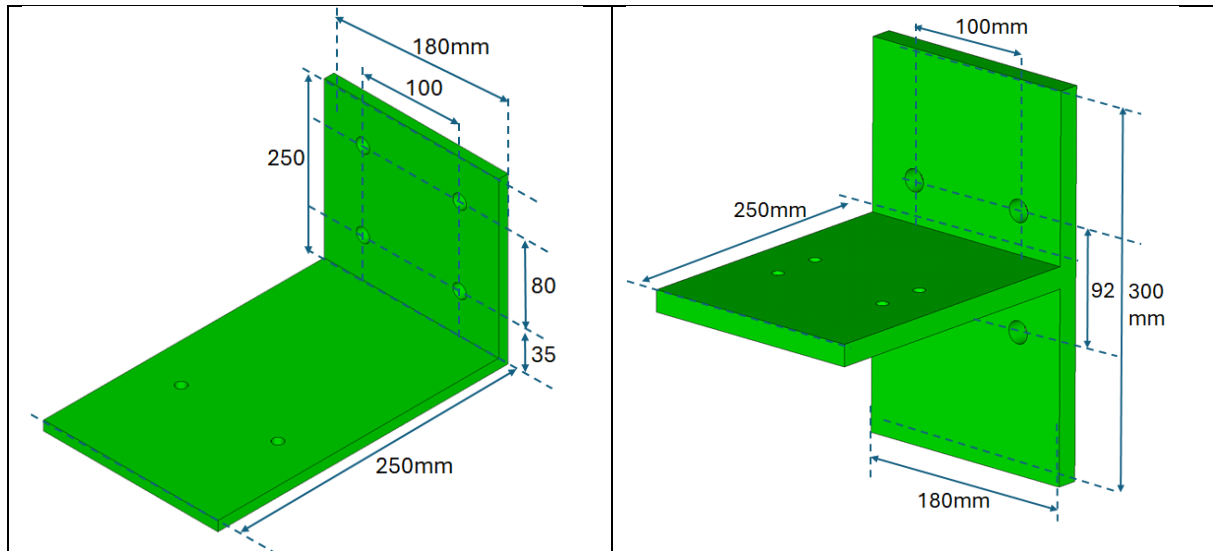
Geometrical dimensions of the considered L and T-shaped profile
